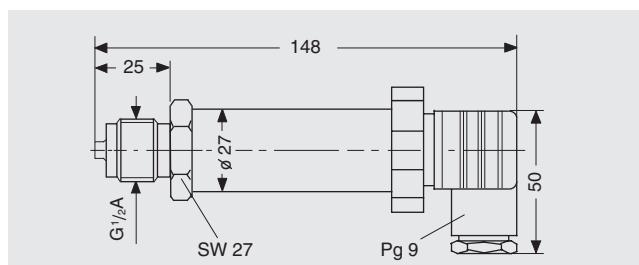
/164 Pressure transmitter 7MF1560, dimensions
